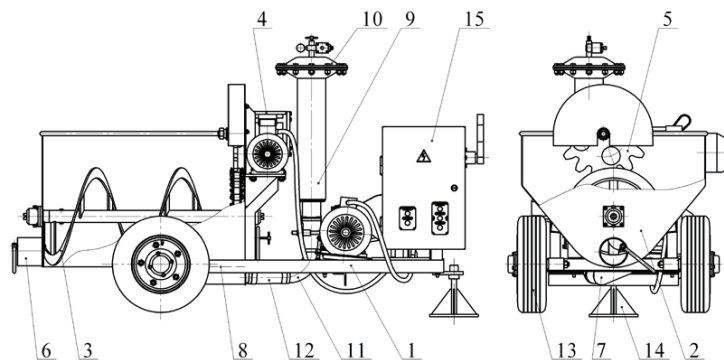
Mortar mixer URZ-3.8: 1 – frame; 2 – case; 3 – mixer; 4 – worm gearbox; 5 – cycloid gear; 6 – shutter; 7 – feeder chamber; 8 – grille; 9 – mortar pump; 10 – combined pressure compensator; 11 – suction pipe; 12 – rubber sleeve; 13 – pneumatic tires; 14 – support; 15 – electrical cabinet
